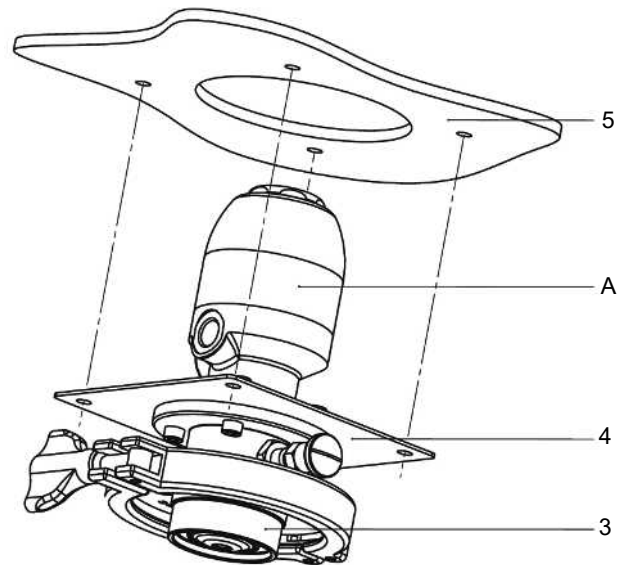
Assembling the pneumatic stainless steel actuator in the housing
